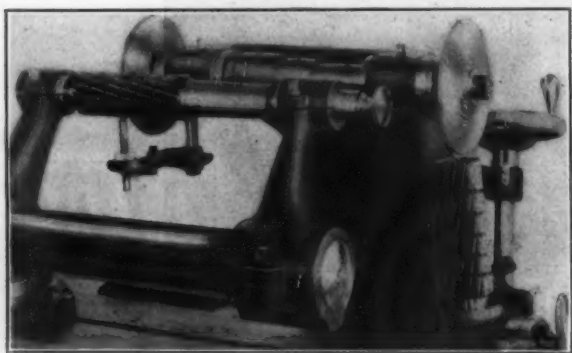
Showing How Work is Held for Grinding Side and End Teeth.
